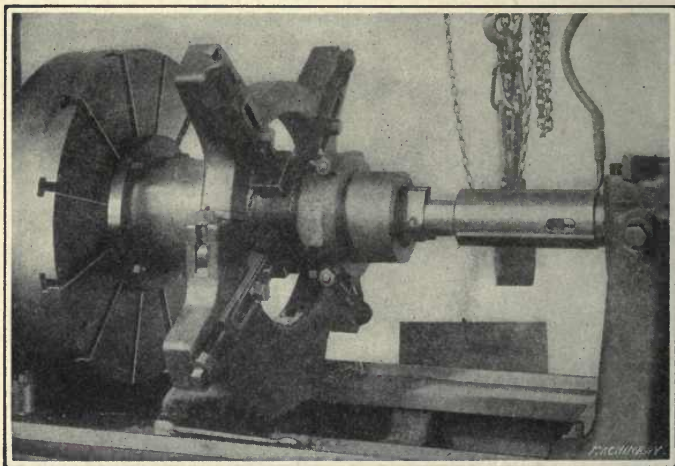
Rough- and finish-boring Internal Diameter on a 36-Inch Engine Lathe
